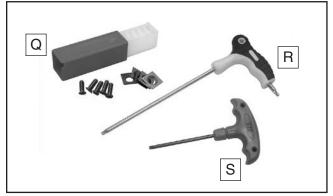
Spare cutterhead inserts and Torx wrenches for spiral cutterhead planers.
